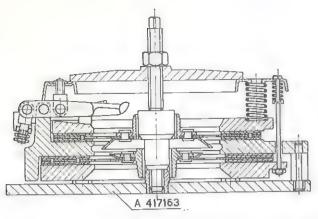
Disassembly and reassembly of the clutch on fixture A 417163.
